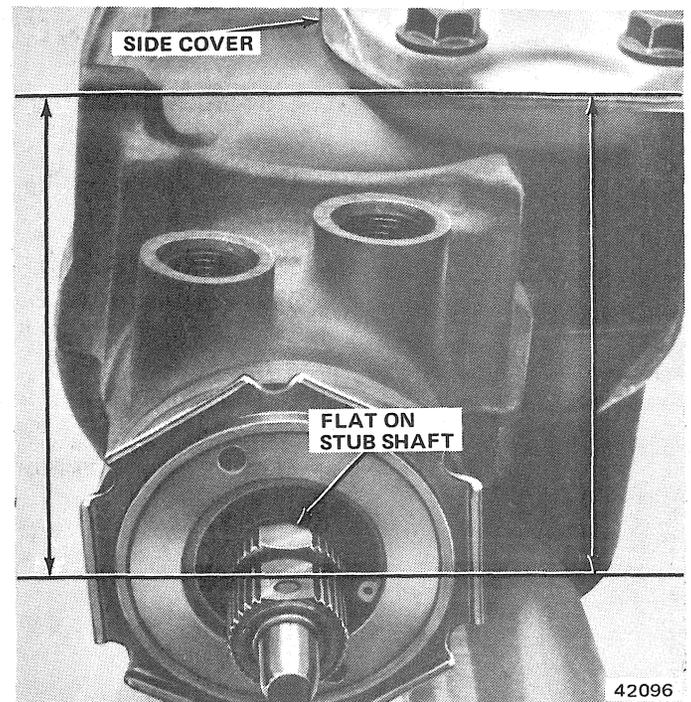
L-45 Pitman Shaft Master Spline Position with Gear Centered
